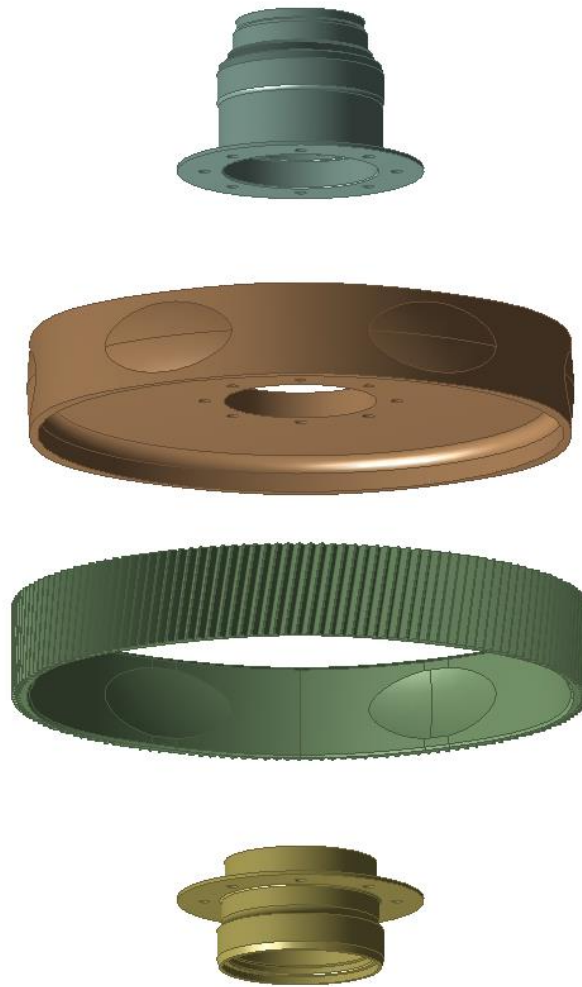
Exploded view of hybrid gear with mechanical interlock concept (mechanical fasteners at inner interface not shown).
